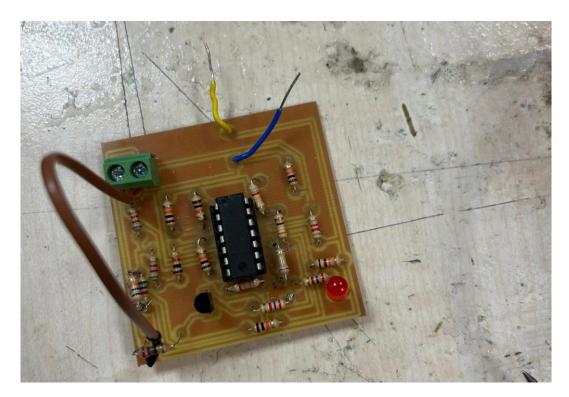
The Final Circuit Implemented on a PCB – Top View
